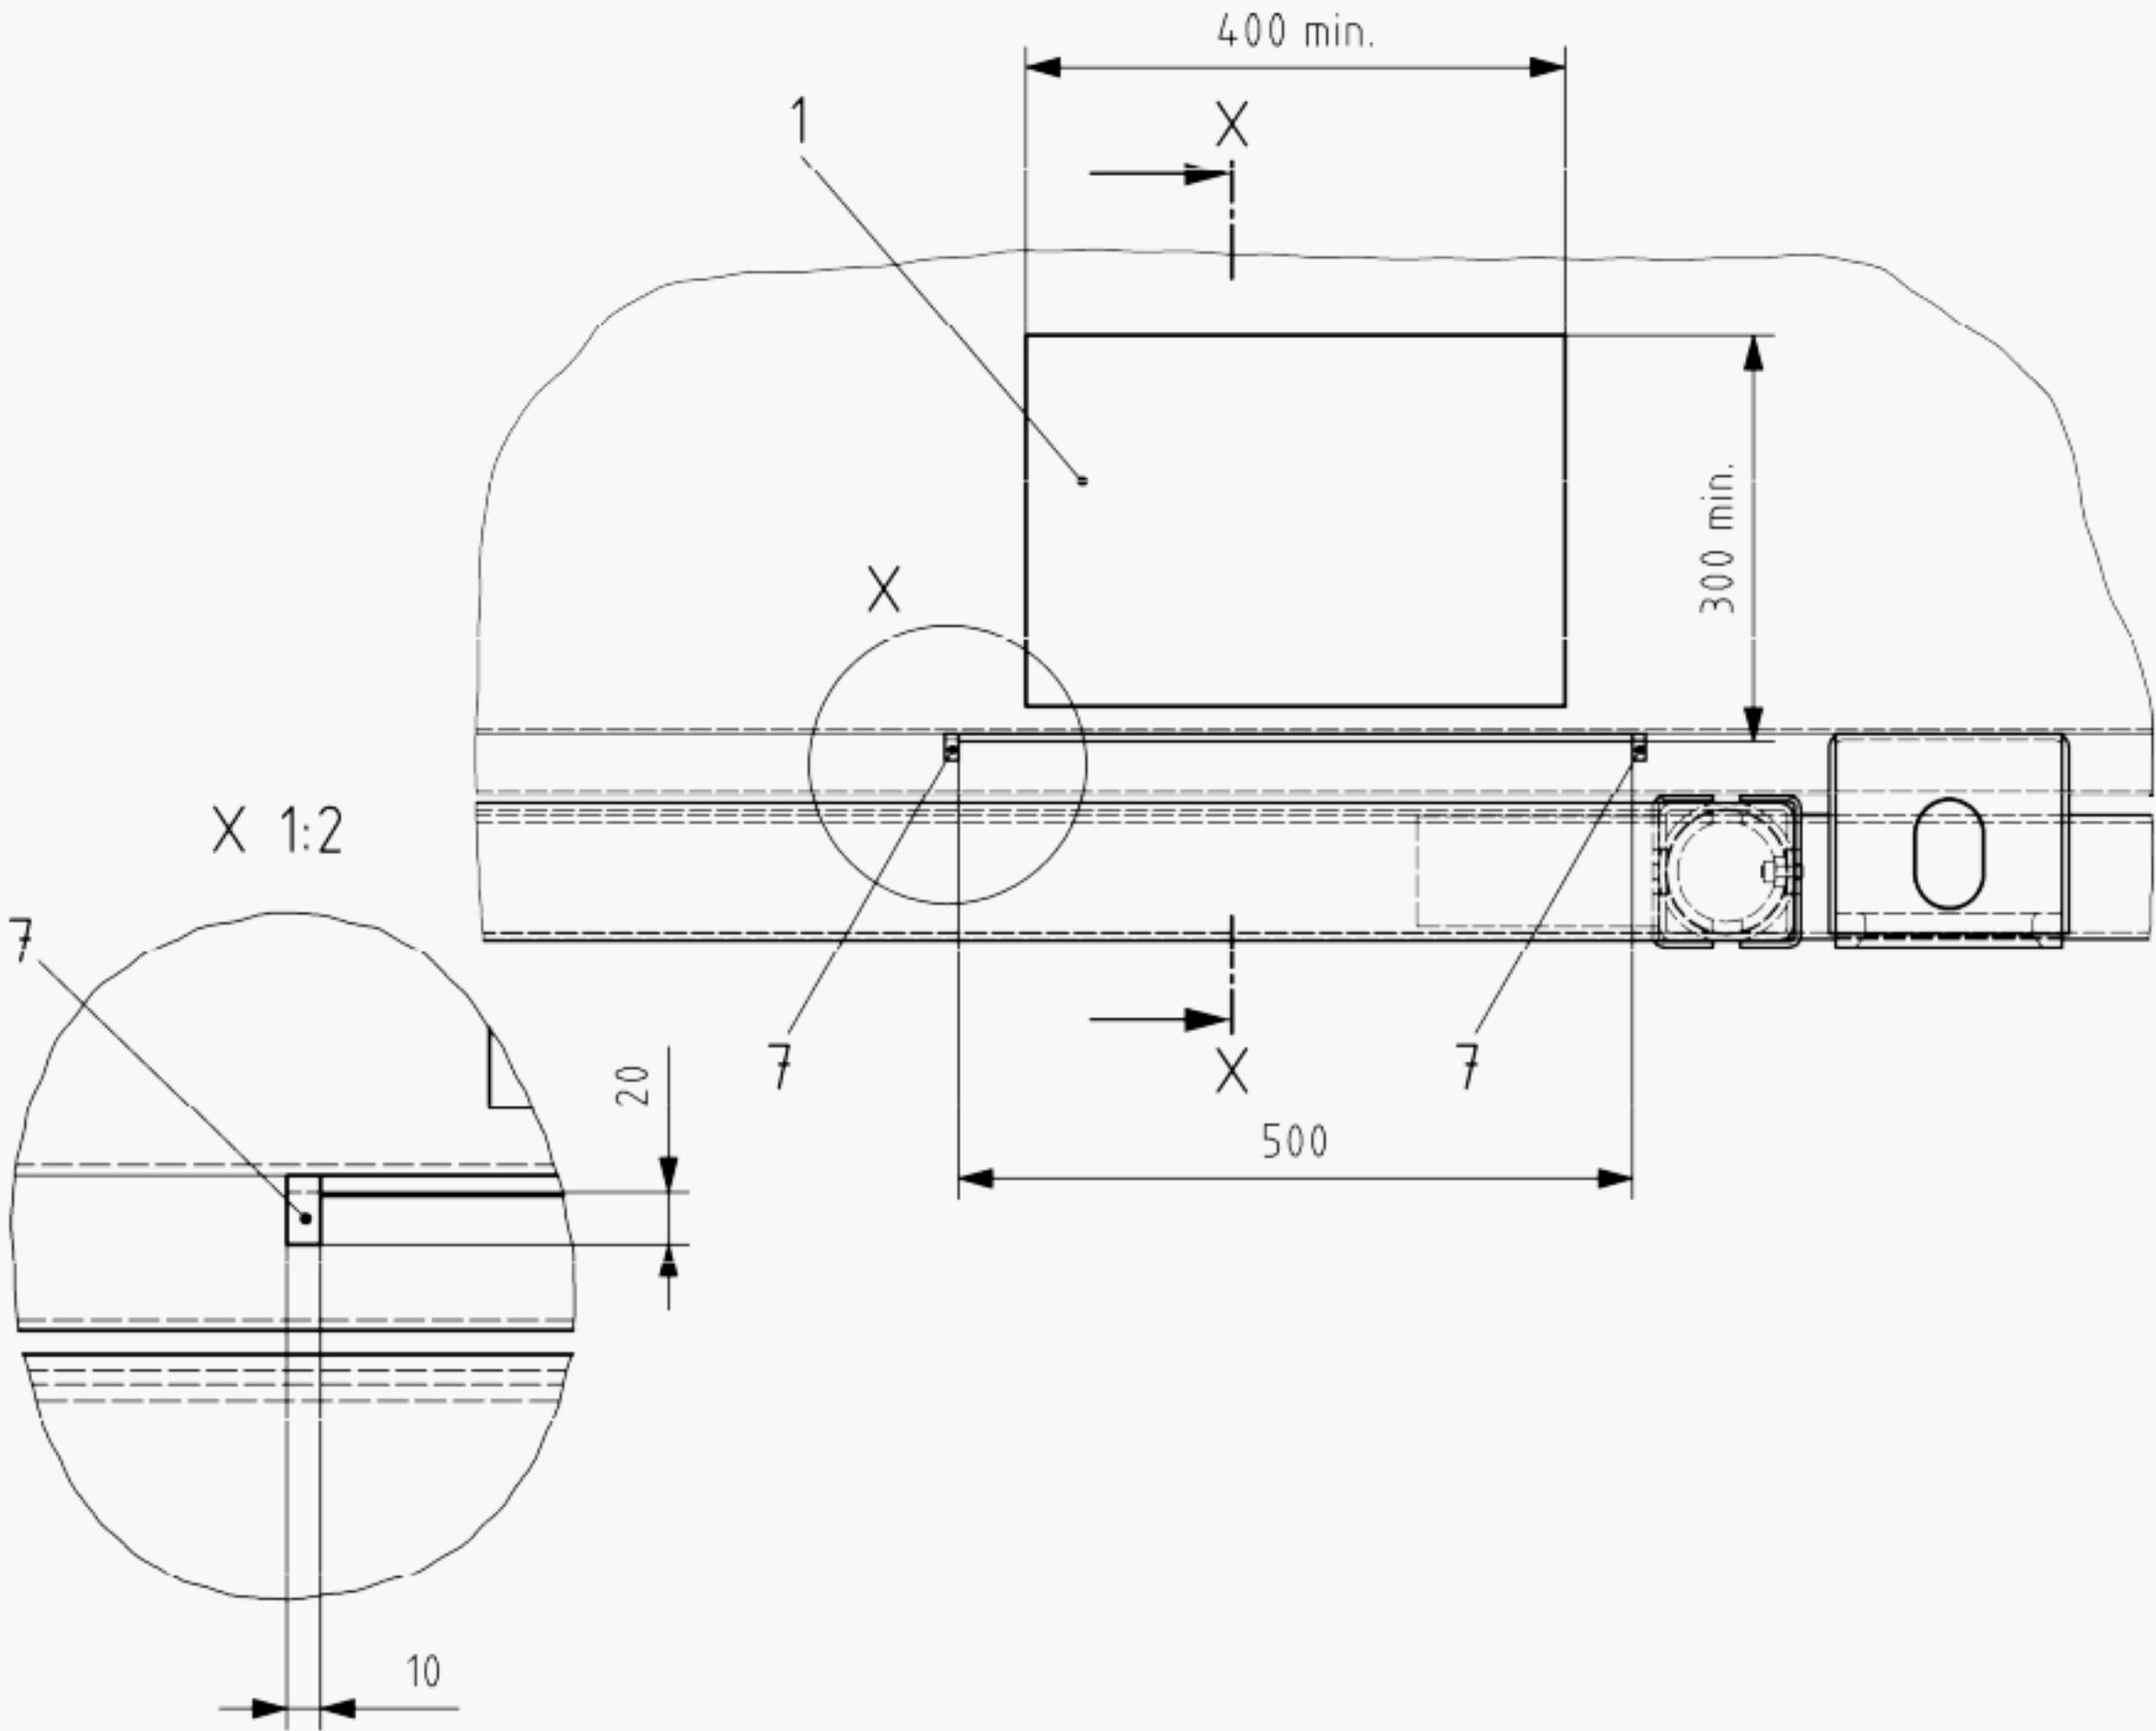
Grappler flange safety lip, end stops and wear-resistant plate – side view
